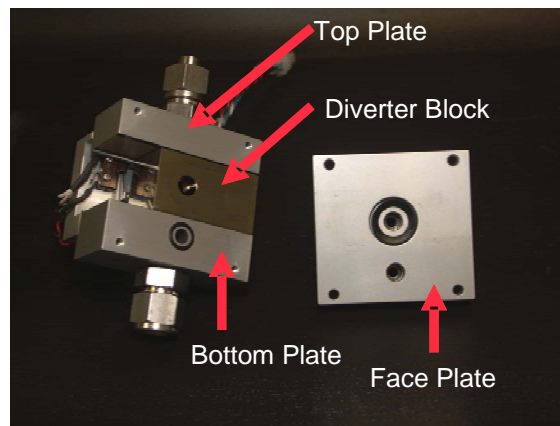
Photograph of the switching valve with the face plate removed, showing the positioning of the valve ports and the diverter block.
